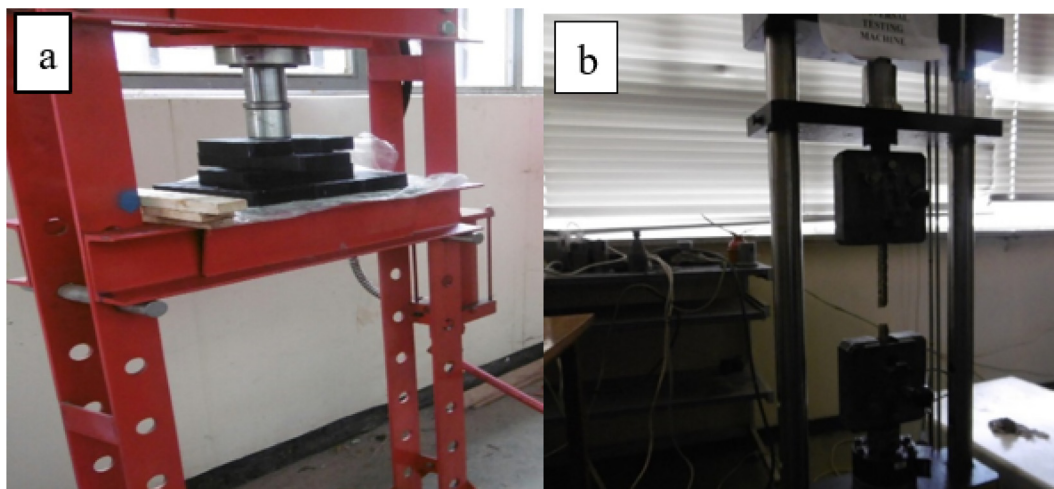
a) Hydraulic pressing machine b) Universal testing machine (UTM).
